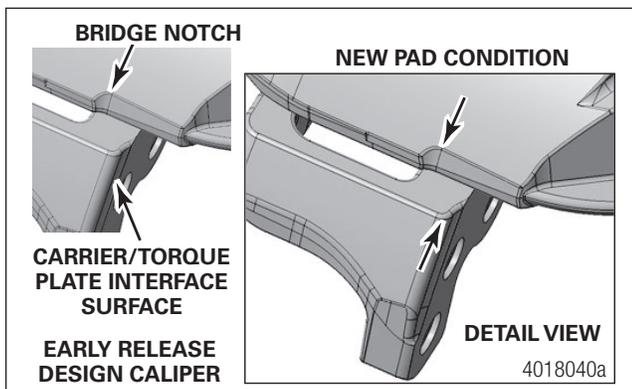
New Pad Condition on Early Release Design Caliper
